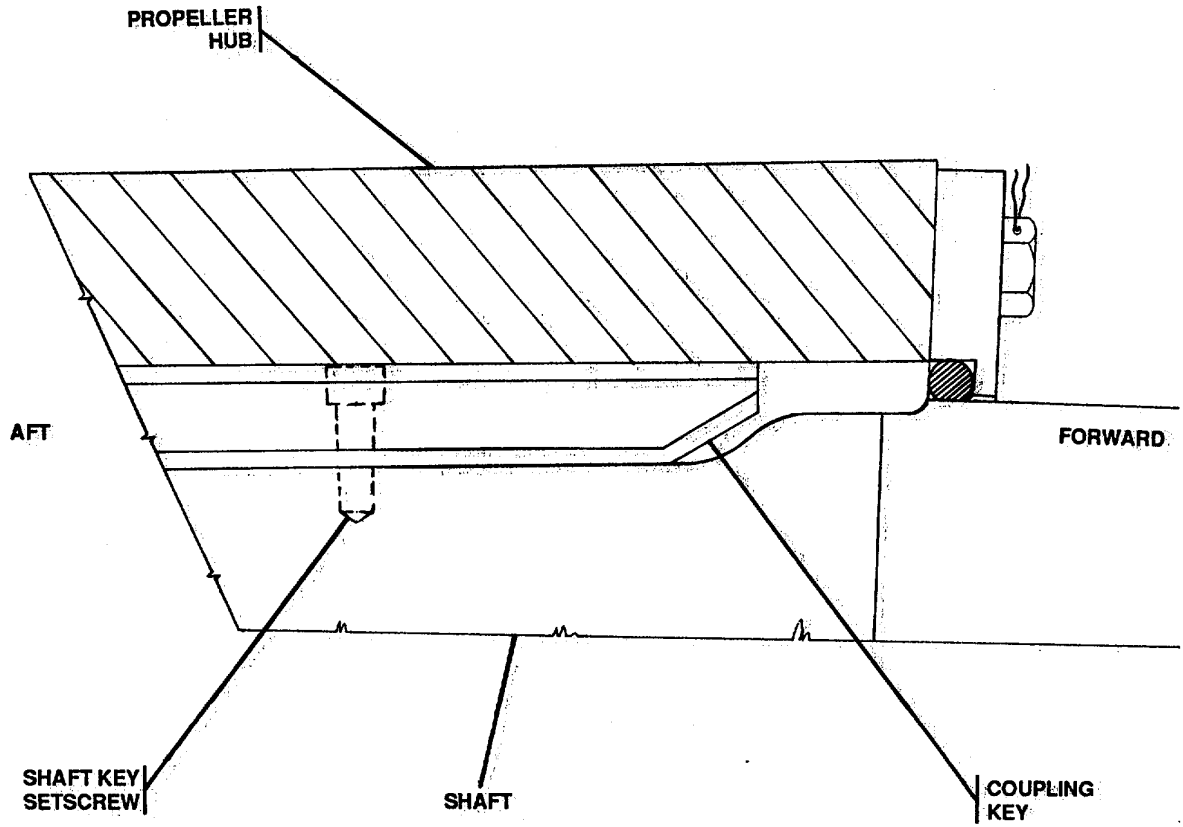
Propeller Shaft Assembly (Sheet 5 of 5).
